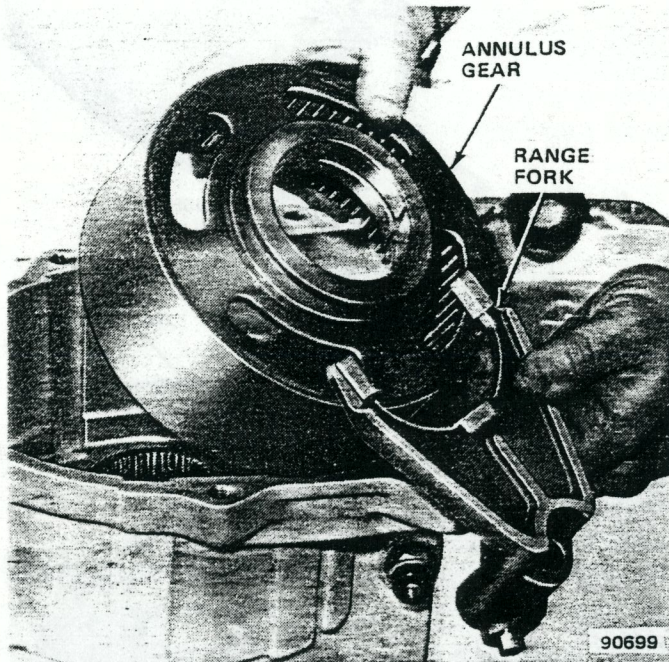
D-59 Annulus Gear and Range Fork Removal/Installation
